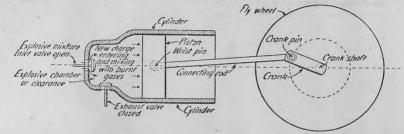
THE FIRST STROKE, SHOWING POSITION OF VALVES WHEN PISTON IS DRAWN BACK ON THE FIRST STROKE AND ENTRANCE OF EXPLOSIVE
